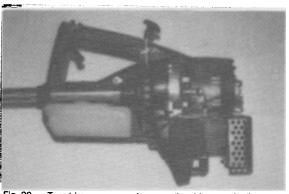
Turn trimmer over and remove the side opposite the gas tank filler.
